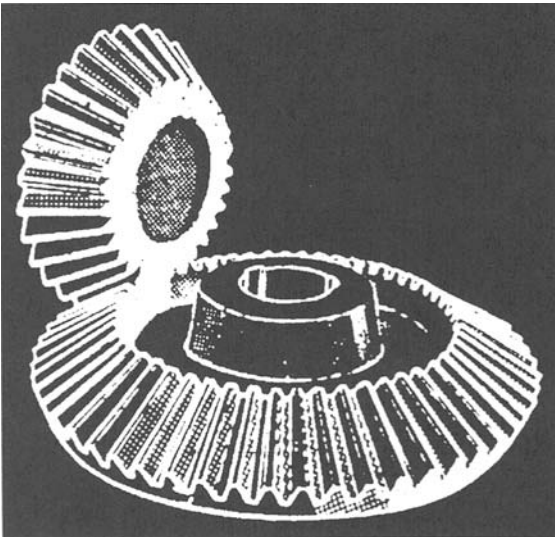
Straight bevel gears. (Courtesy of Lubrizol Corp.)
